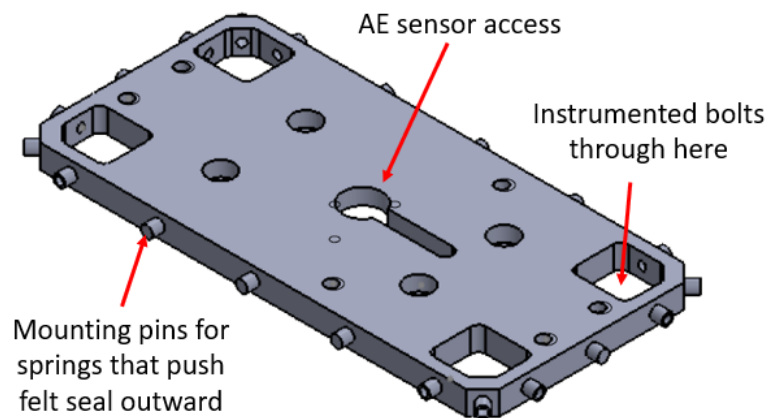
CAD model of modified center seal plate (3.6" x 7.6").
